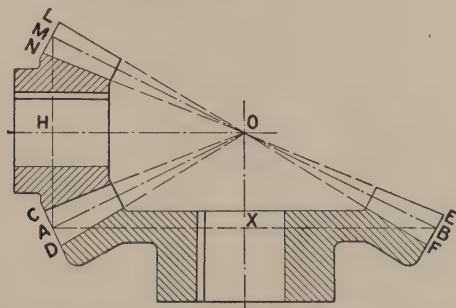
Directions for laying out bevel gears, shafts at right angles.
